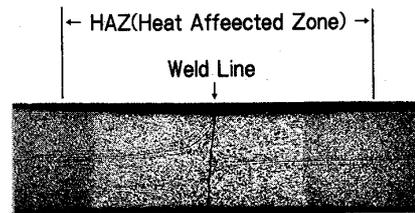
Welding Cross Section of Extra Low Carbon Steel by Conventional F. B. Welder
